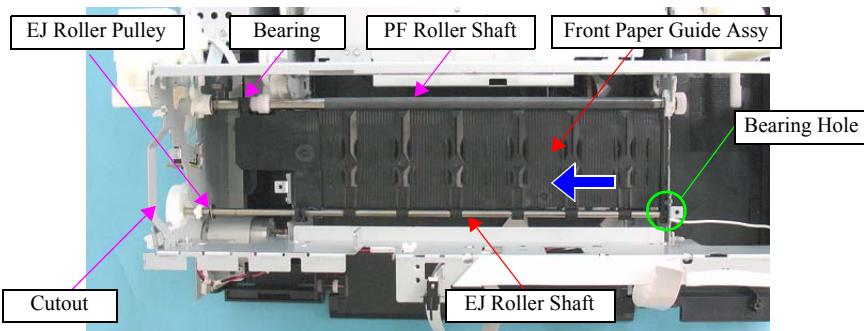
Removing the Front Paper Guide & EJ Roller Assy (4)
